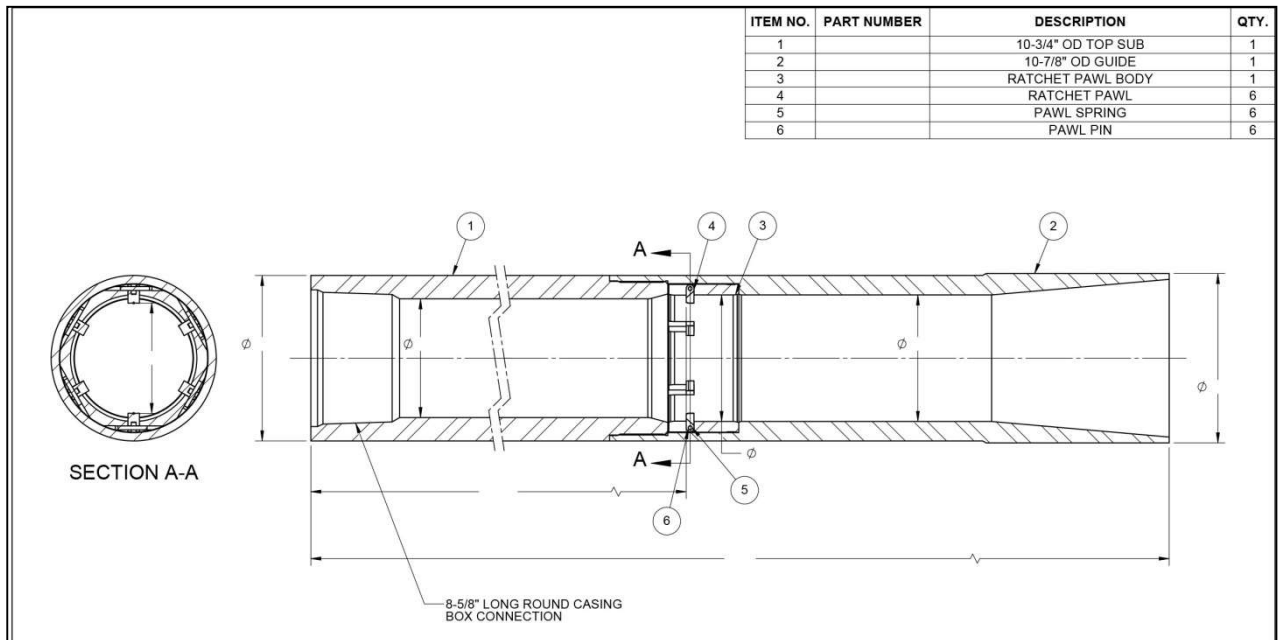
Layout Drawing of NOV Ratchet Pawl Casing Extraction Tool
